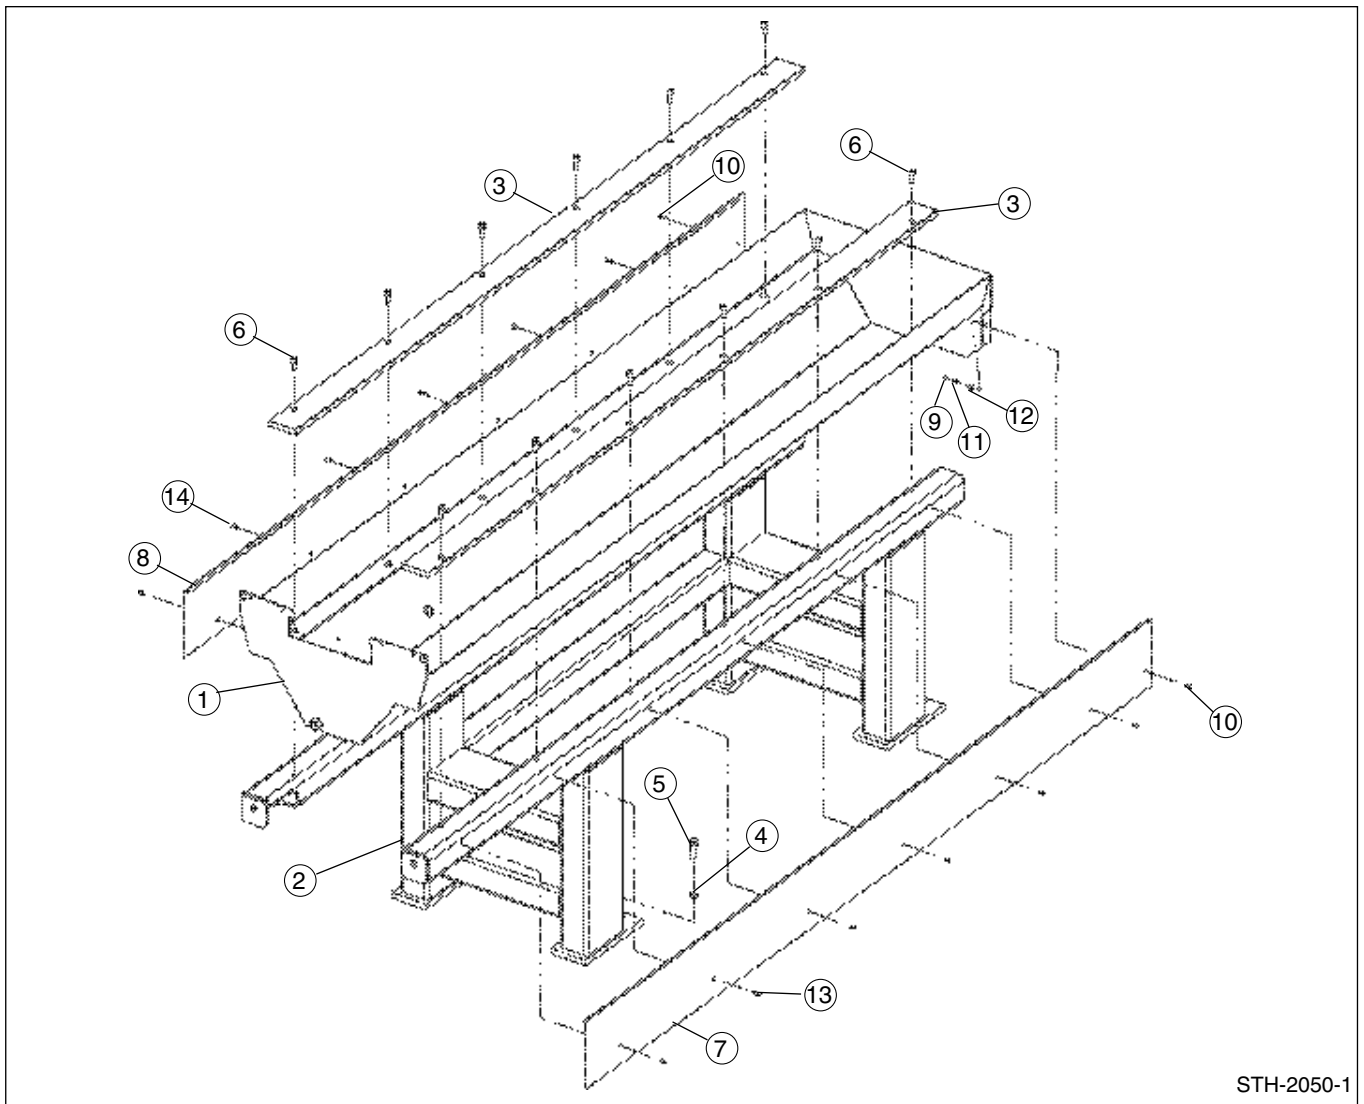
FIGURE H – CARRIAGE ASSEMBLY (3 of 3)
